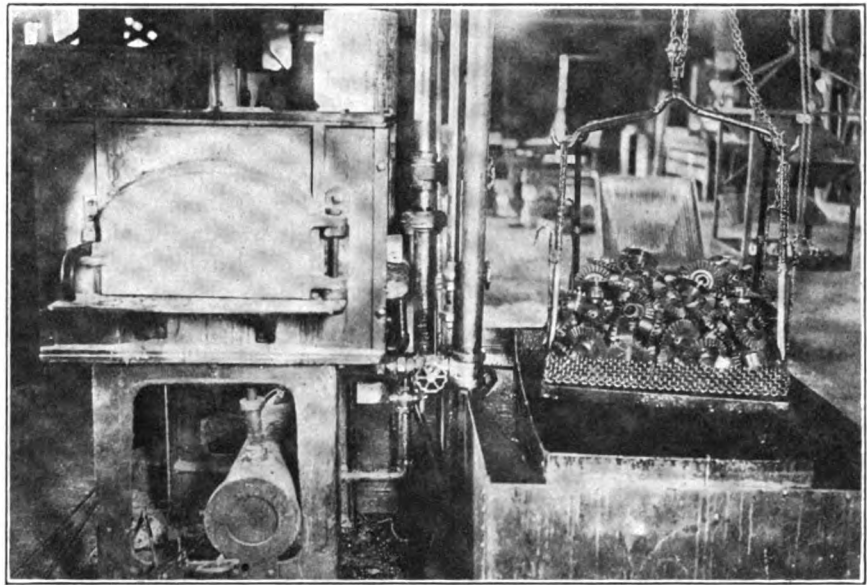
LARGE OIL BATH, WITH BASKET RAISED, BESIDE FURNACE
